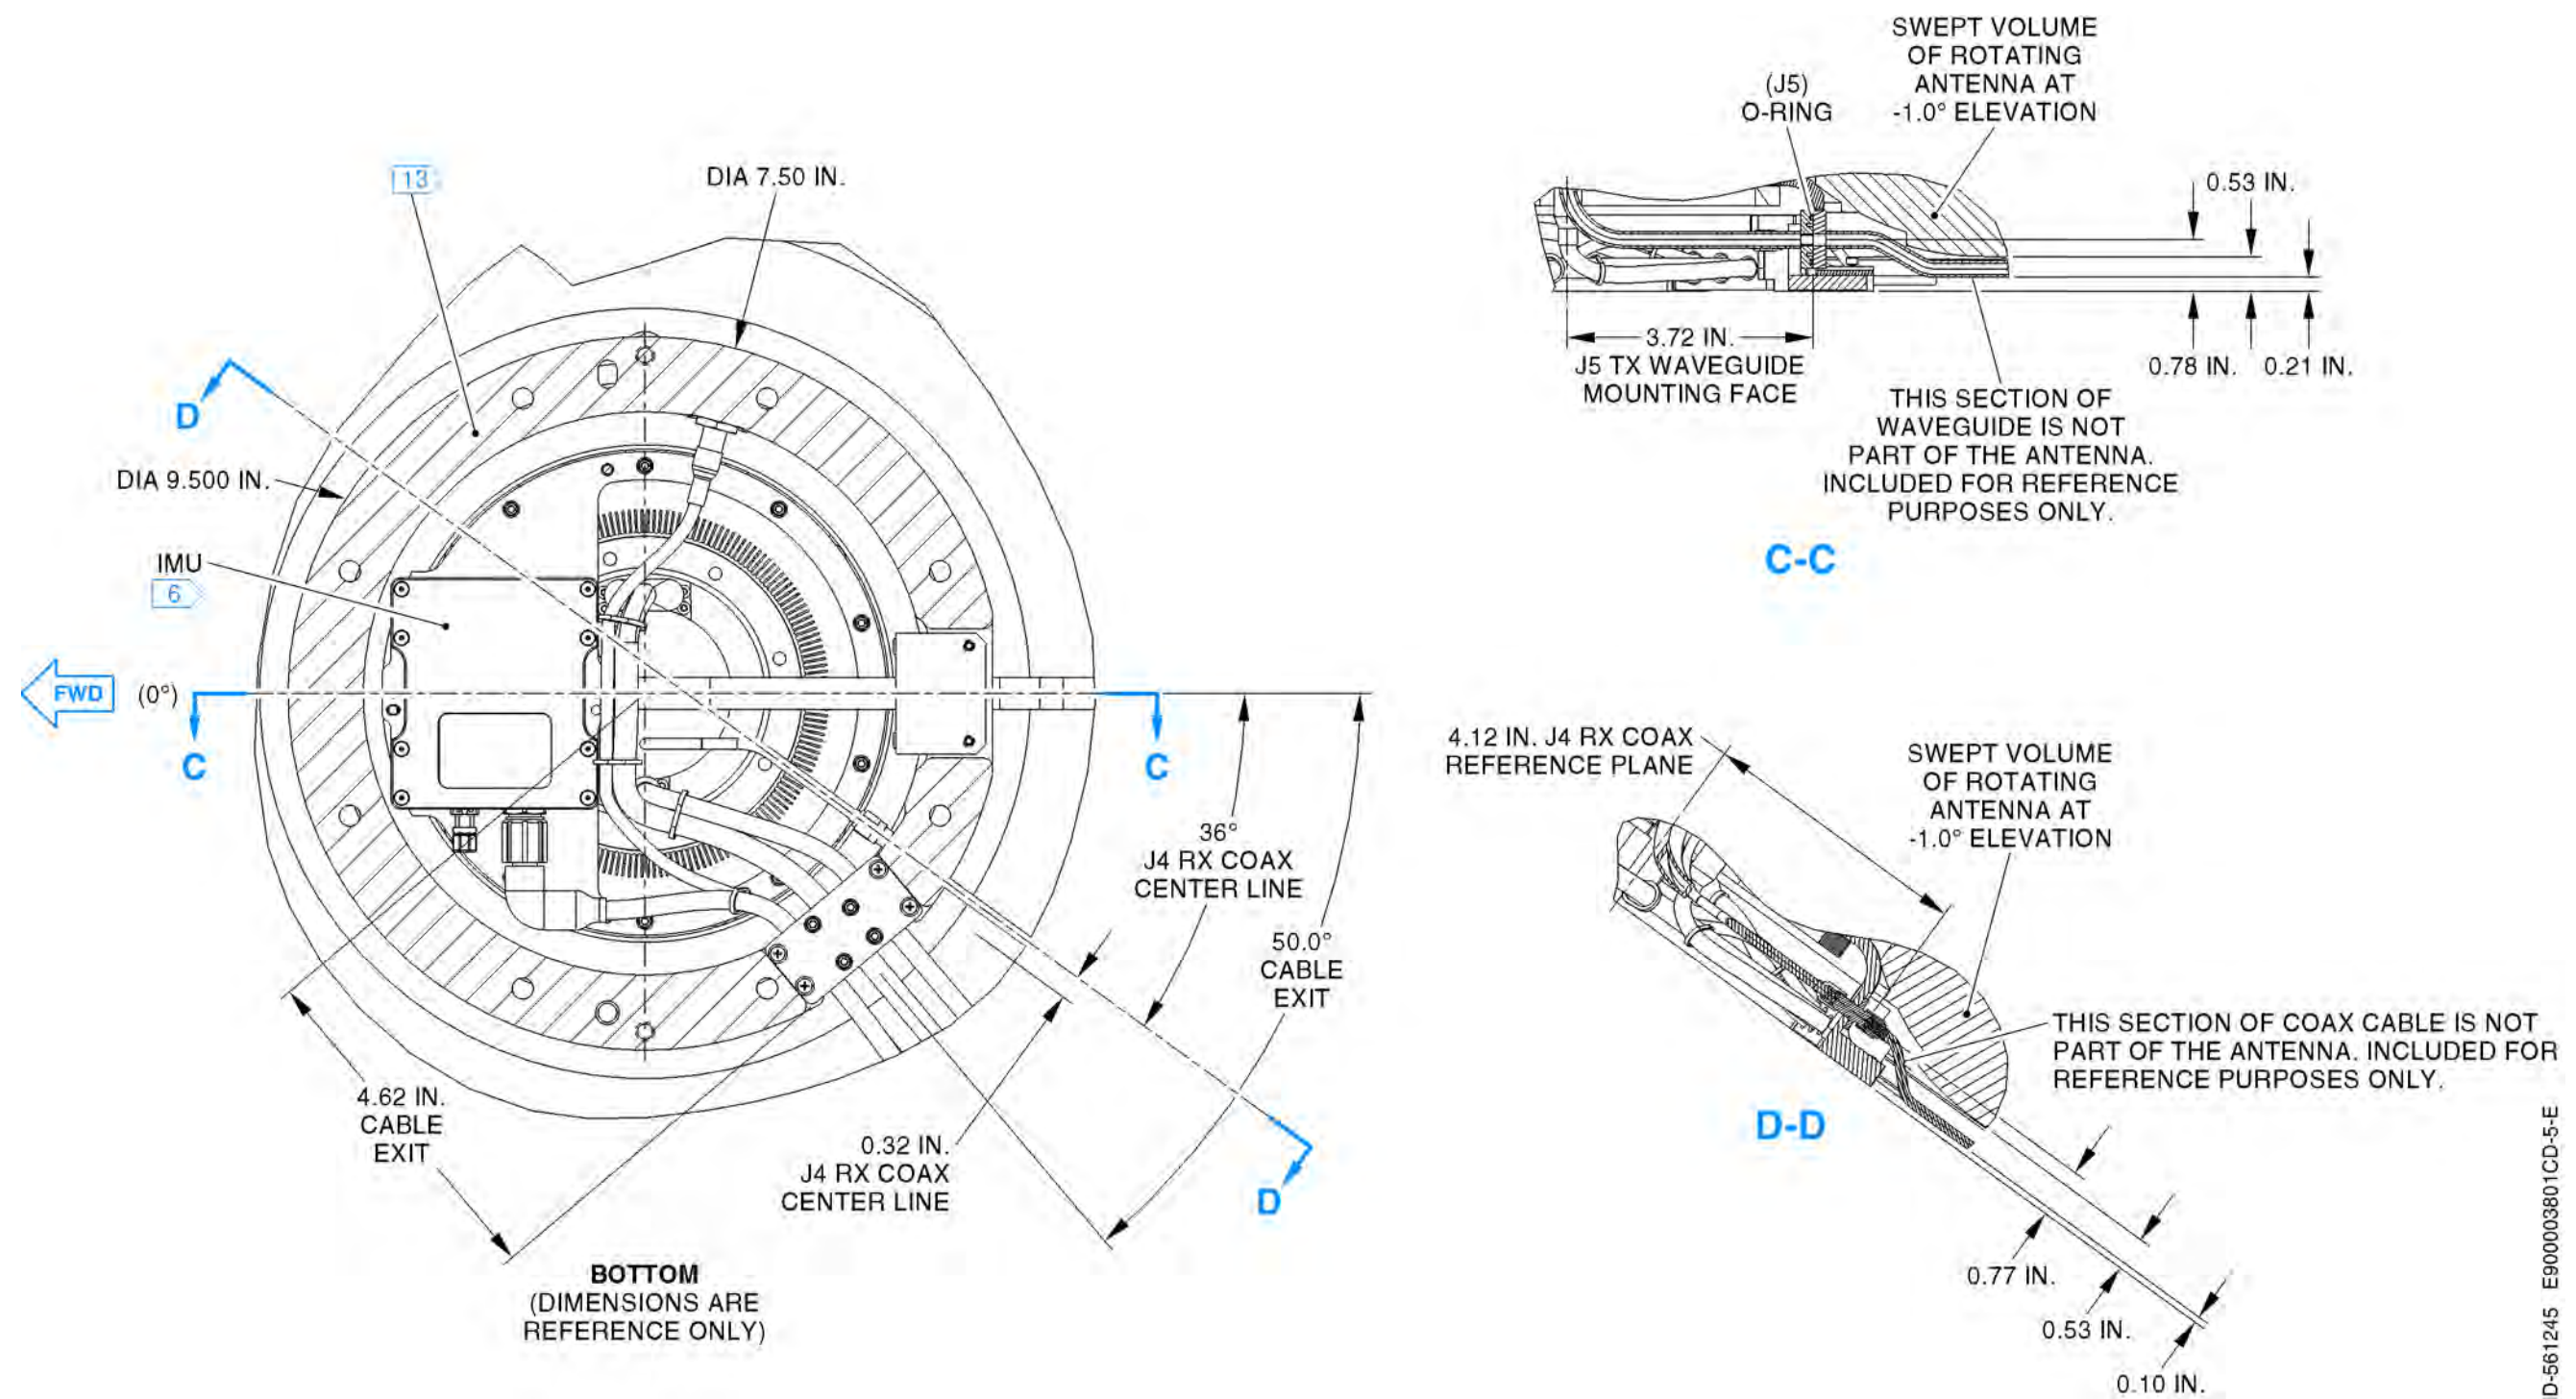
FMA Outline and Installation Drawing (Sheet 5 of 12)
